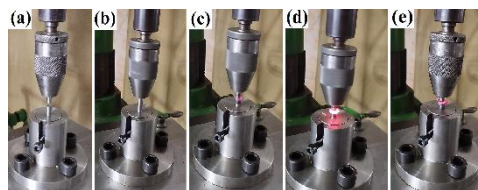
RFW process phases during the welding operation: (a) acousting, (b, c and d) friction, (e) forging.
